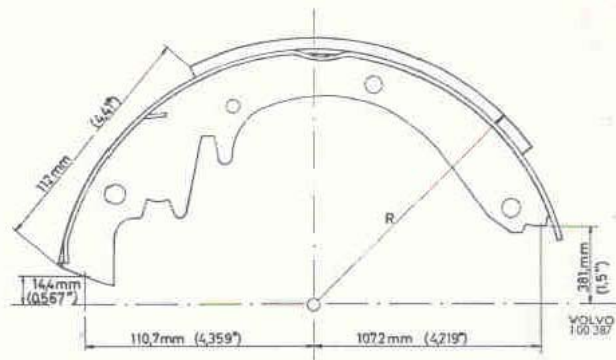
Adjusting measurement for front wheel front brake shoes.
